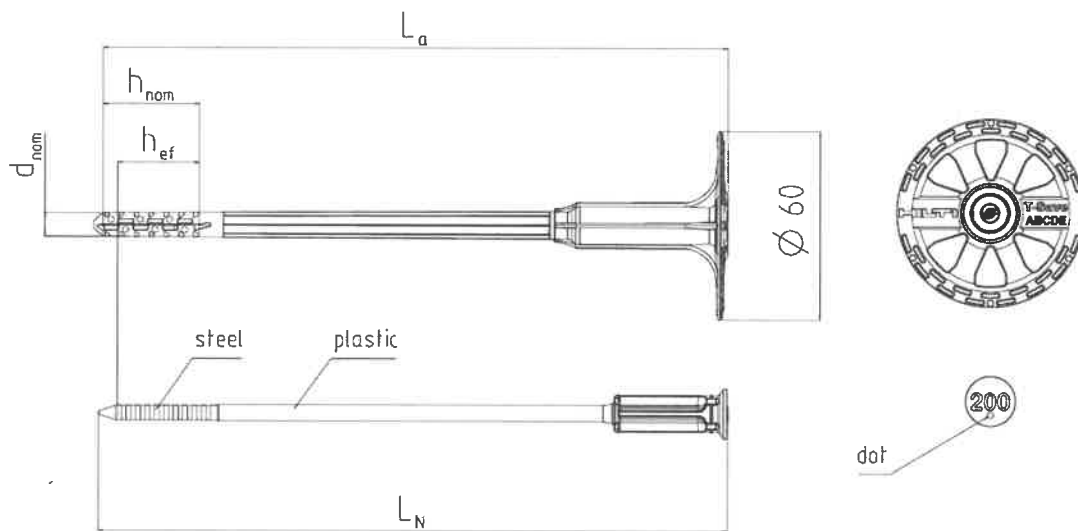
T-Save HTS-M - assembled sleeve, plate and composite pin
